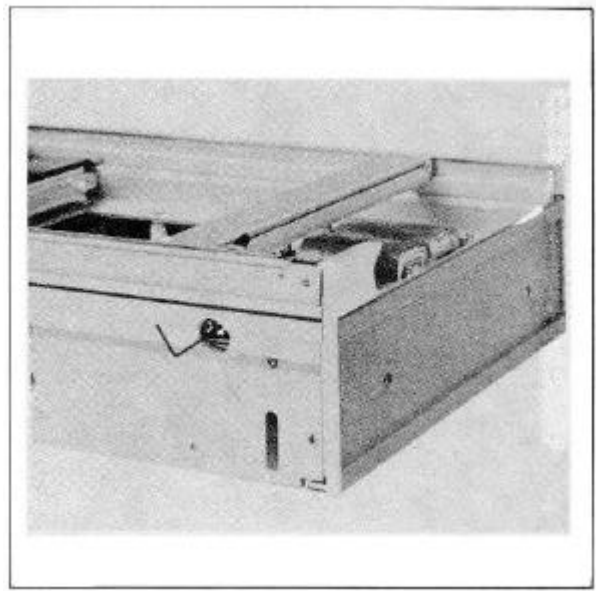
Y-AXIS BACKLASH ADJUSTMENT (GEAR ADJUSTING SCREW)
